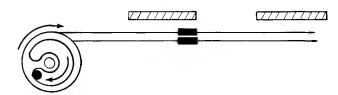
COCKED POSITION — ARROWS INDICATE DIRECTION OF PULL OF TAKE-UP-ROLLER SPRINGS
